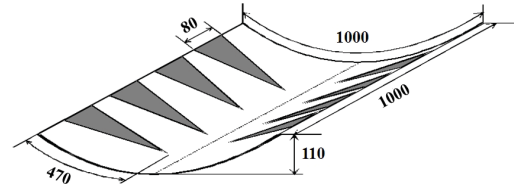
Specifications of a cylindrical plate specimen (unit: mm)
